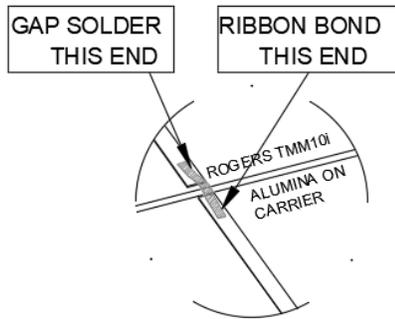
Interface assembly instruction for ribbon bond between Rogers TMM10i included on the manufacturing drawings.
